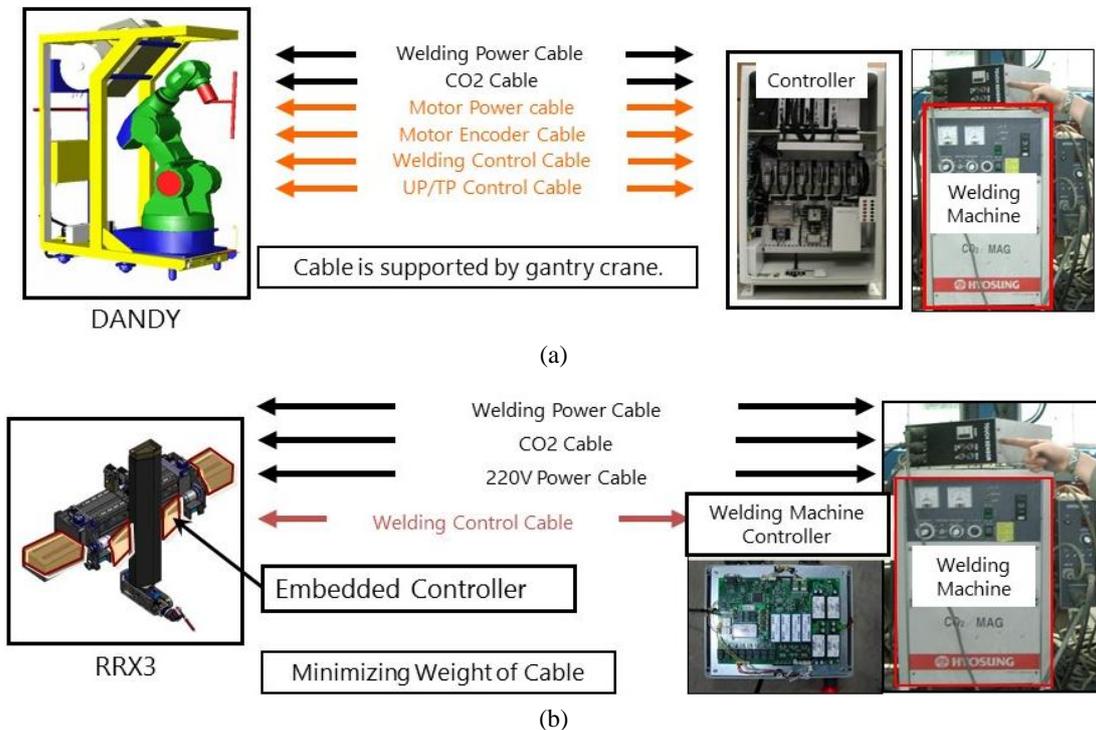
The cables between the controller and the welding robot (DANDY, RRX3): (a) cable between controller and fixed type welding robot ‘DANDY’, (b) cable between controller and mobile welding robot ‘RRX3’.
